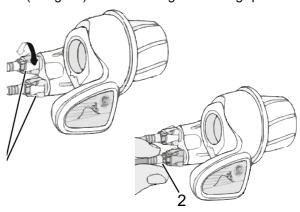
Twist grip with adjusting sleeves (1) and play of the gear shift (2)
